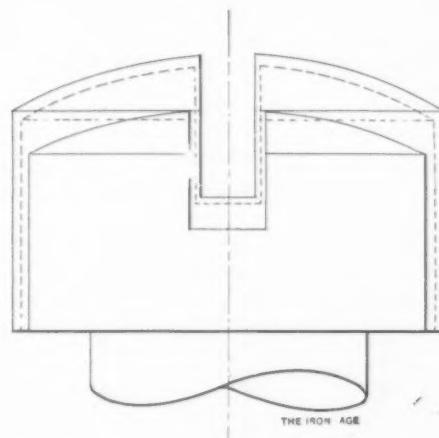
Showing the Same for Fillister Head Machine Screws.
